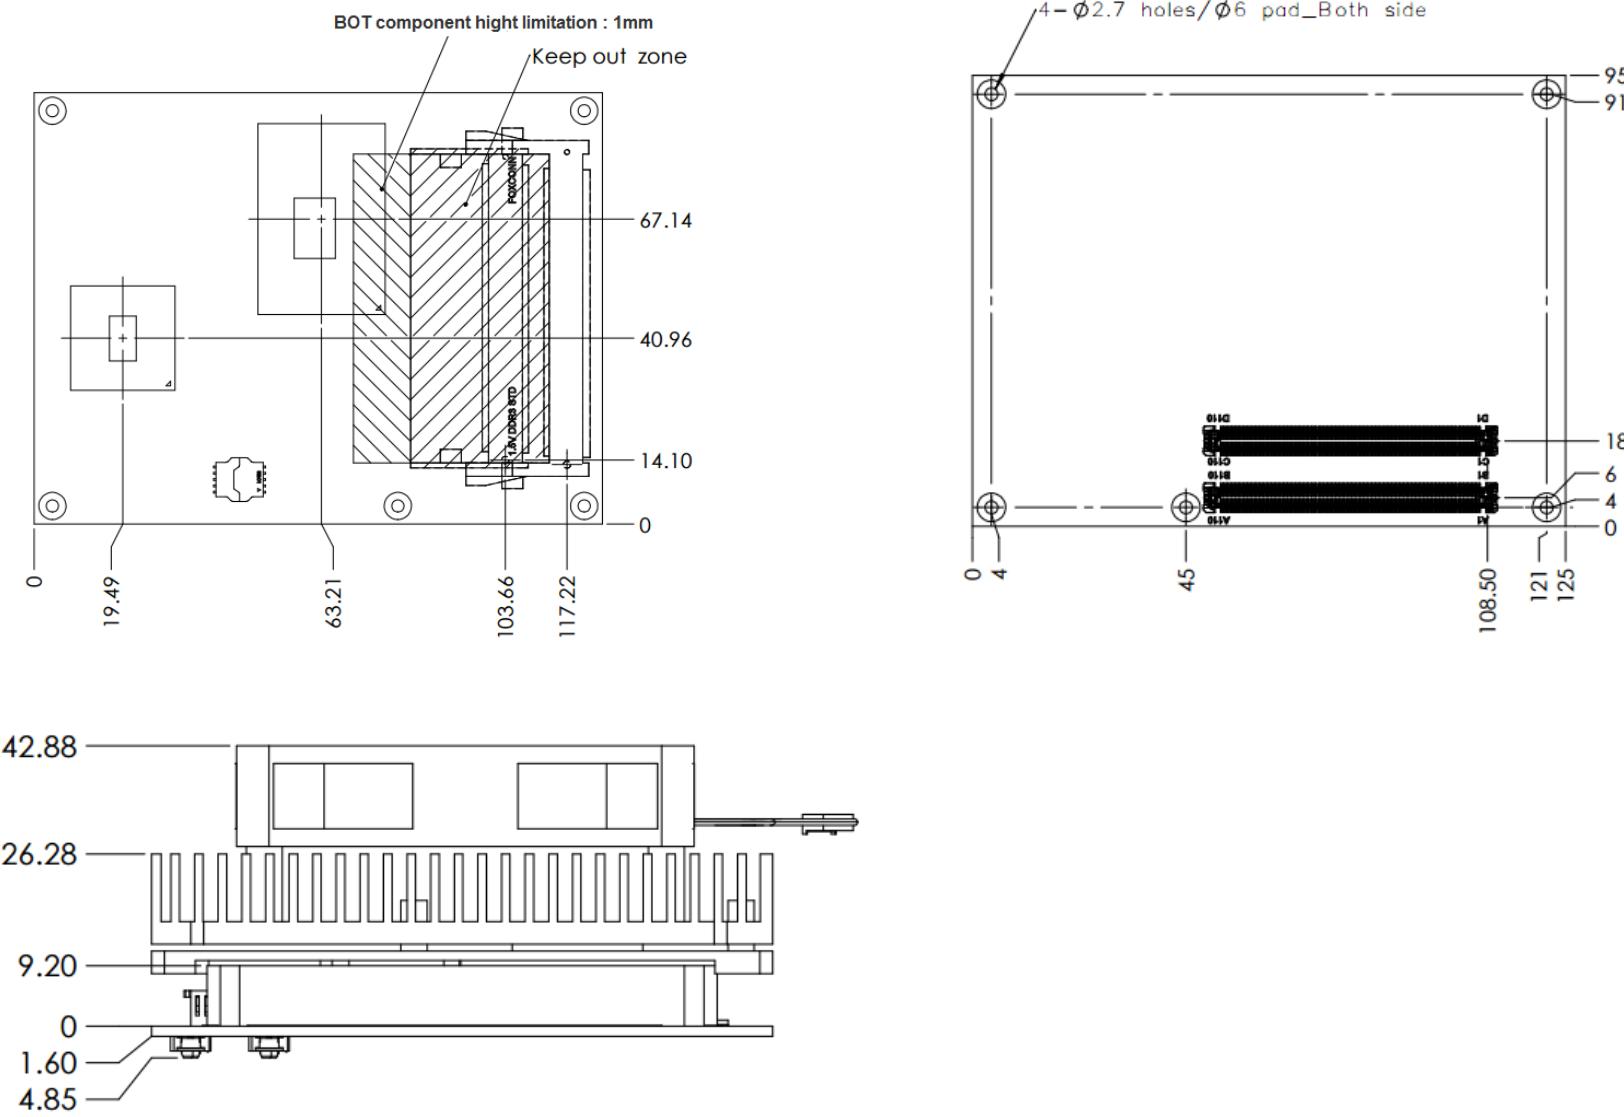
Mechanical Dimensions - Top/Bottom/Assembly
